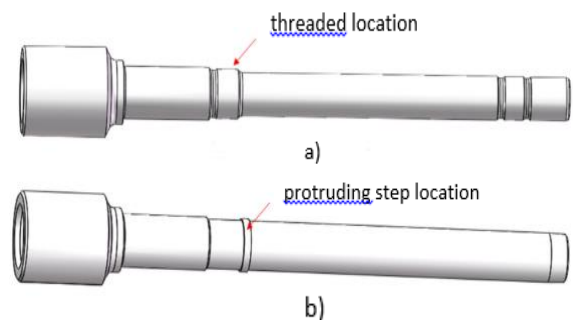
Design of positive displacement motor shaft: a) initial design; b) improved design
